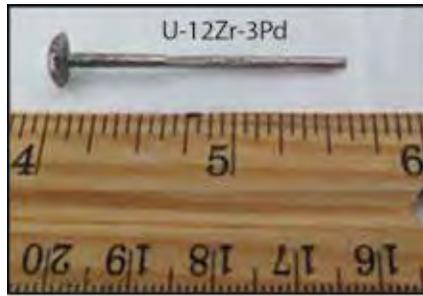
Prototypic FAST fuel slugs casting using the pressure differential assisted gravity casting technique.
